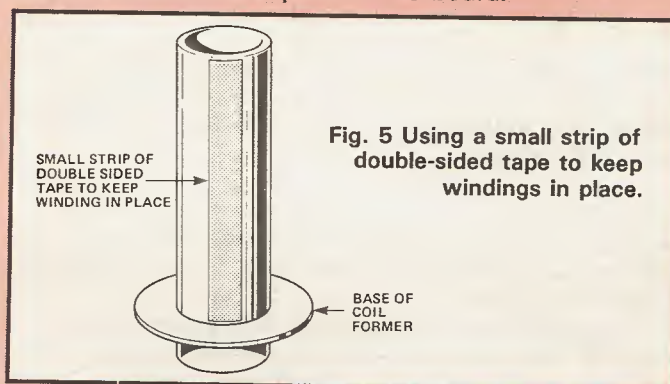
Using a small strip of double-sided tape to keep windings in place.
